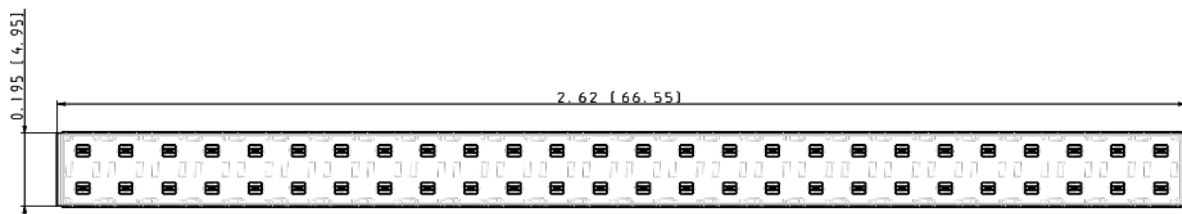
Top View of Samtec Connector SSQ-126-03
